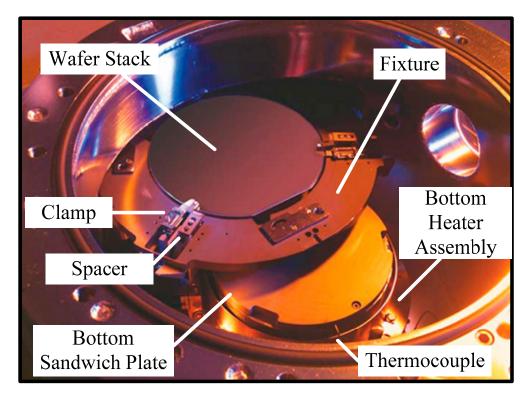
Photograph of the inside of a SUSS SB-6e wafer bonder chamber as the fixture is loaded into the chamber. A great deal of equipment is needed to produce a well aligned bond [30].
